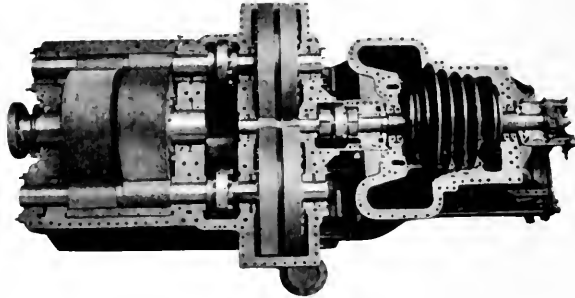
One-plane War Emergency Type Geared Turbine with Casing Removed
